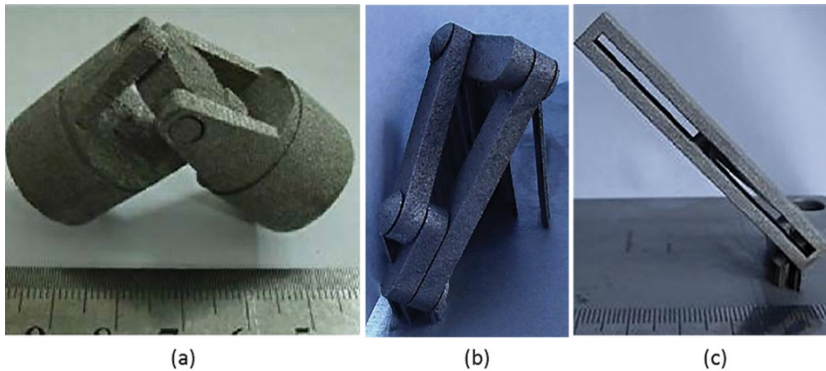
Non-assembly joint samples fabricated in stainless steel material using metallic PBF processes. (a) Universal joint, (b) crank rocker mechanism[8] and (c) rocker-slider mechanism[27].
